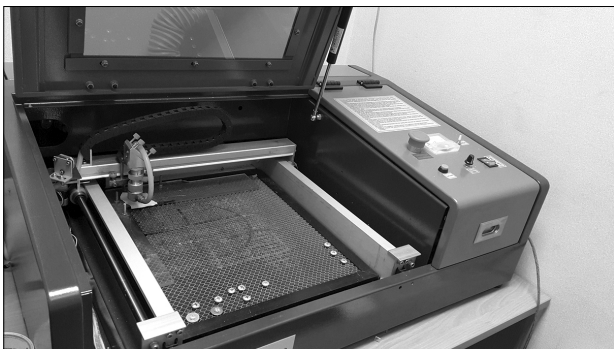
Laser cutting machine (Microlaser C40, CORYART).
